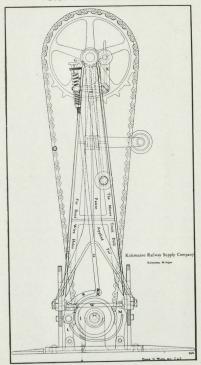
Sectional elevation showing feed and quick advance and return mechanism for spindle.
